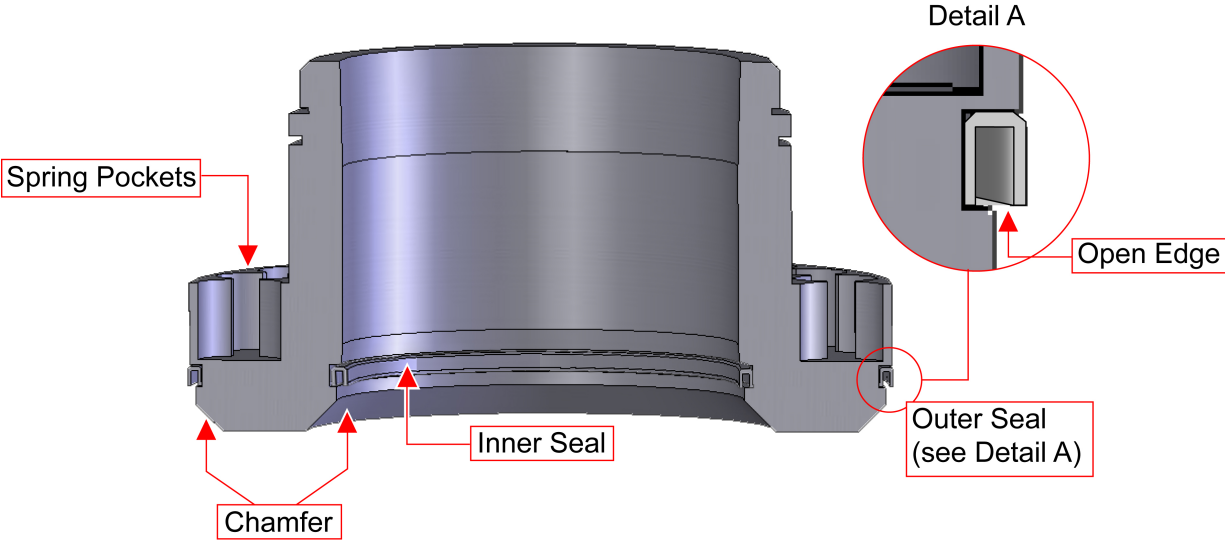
Cross-Section View of Piston Showing Seal Orientation
